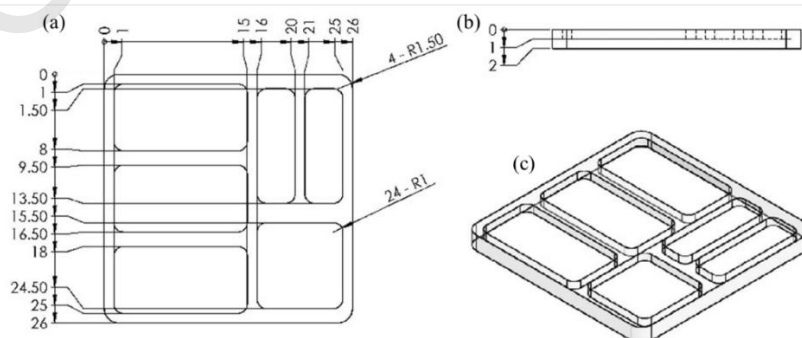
Dosimeter holder (D8): (a) Top view, (b) side view, (c) orthographic view
